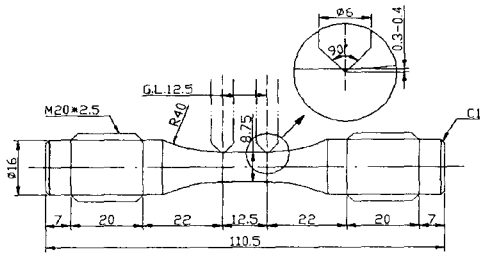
Geometry and configuration of STS 304 stainless steel specimen for fatigue life test at 650°C in air
